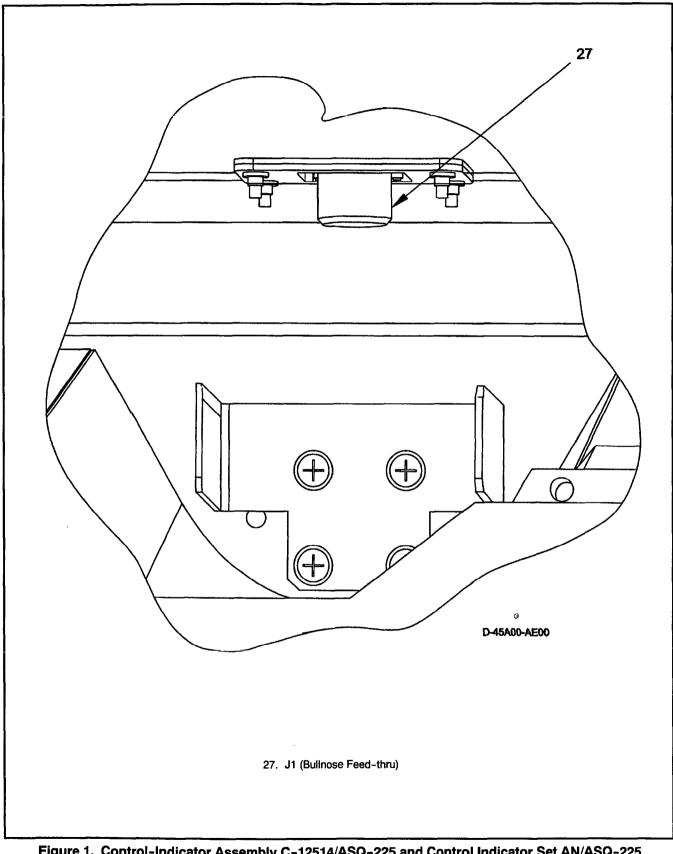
Control-Indicator Assembly C-12514/ASQ-225 and Control Indicator Set AN/ASQ-225 Components (Sheet 5)
